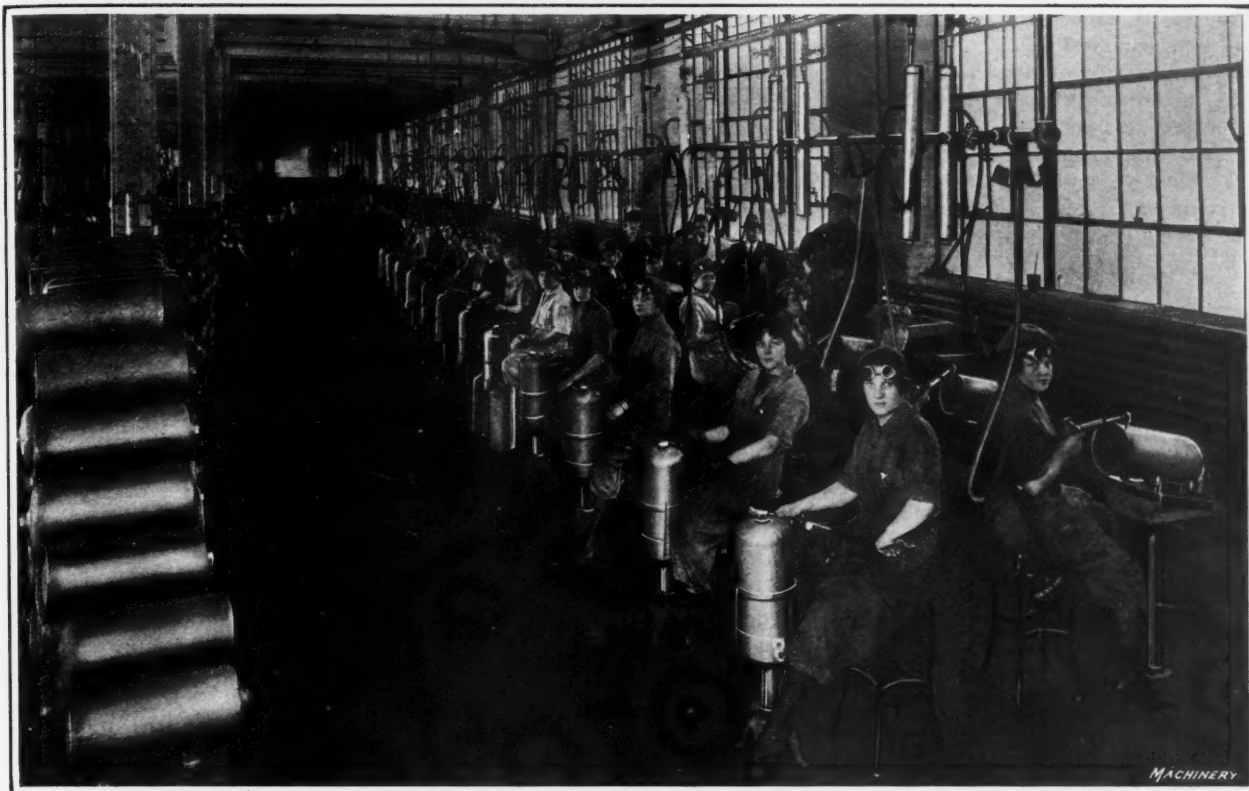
Apparatus used for welding Gas Tanks—Note the Work-holding Stands and Overhead Connection with Blowpipes
